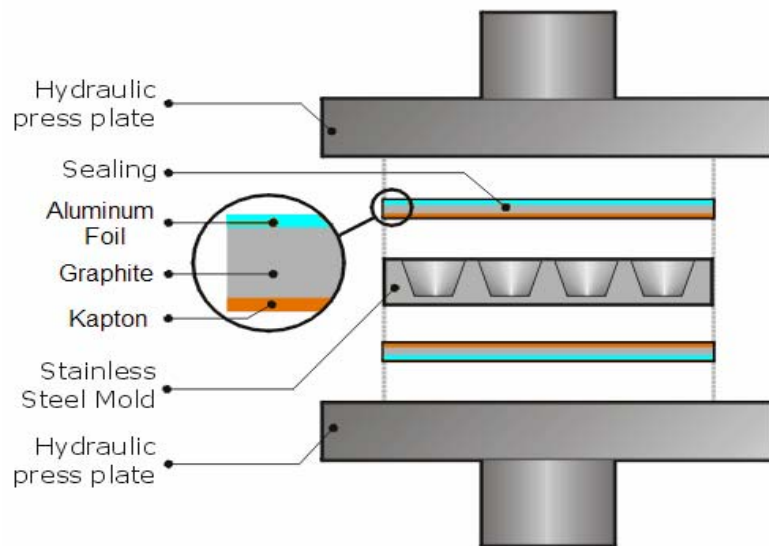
Schematic of mold and hot press set-up to fabricate aerogels using Union's Rapid Supercritical Extraction (RSCE) technique.<sup>8</sup>
